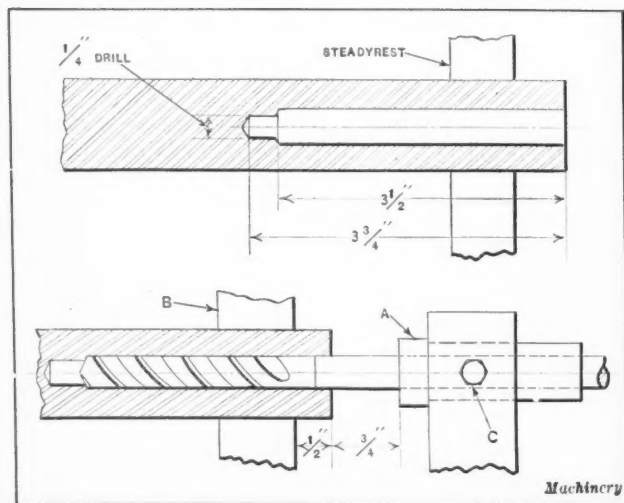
Diagrams illustrating Methods used in drilling Spindle shown in Fig. 1
